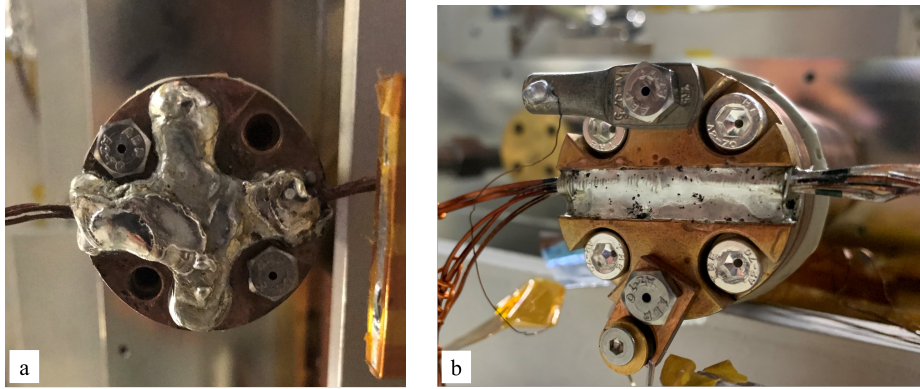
(a) Original and (b) improved soldering methods for connecting the LTS wires.
